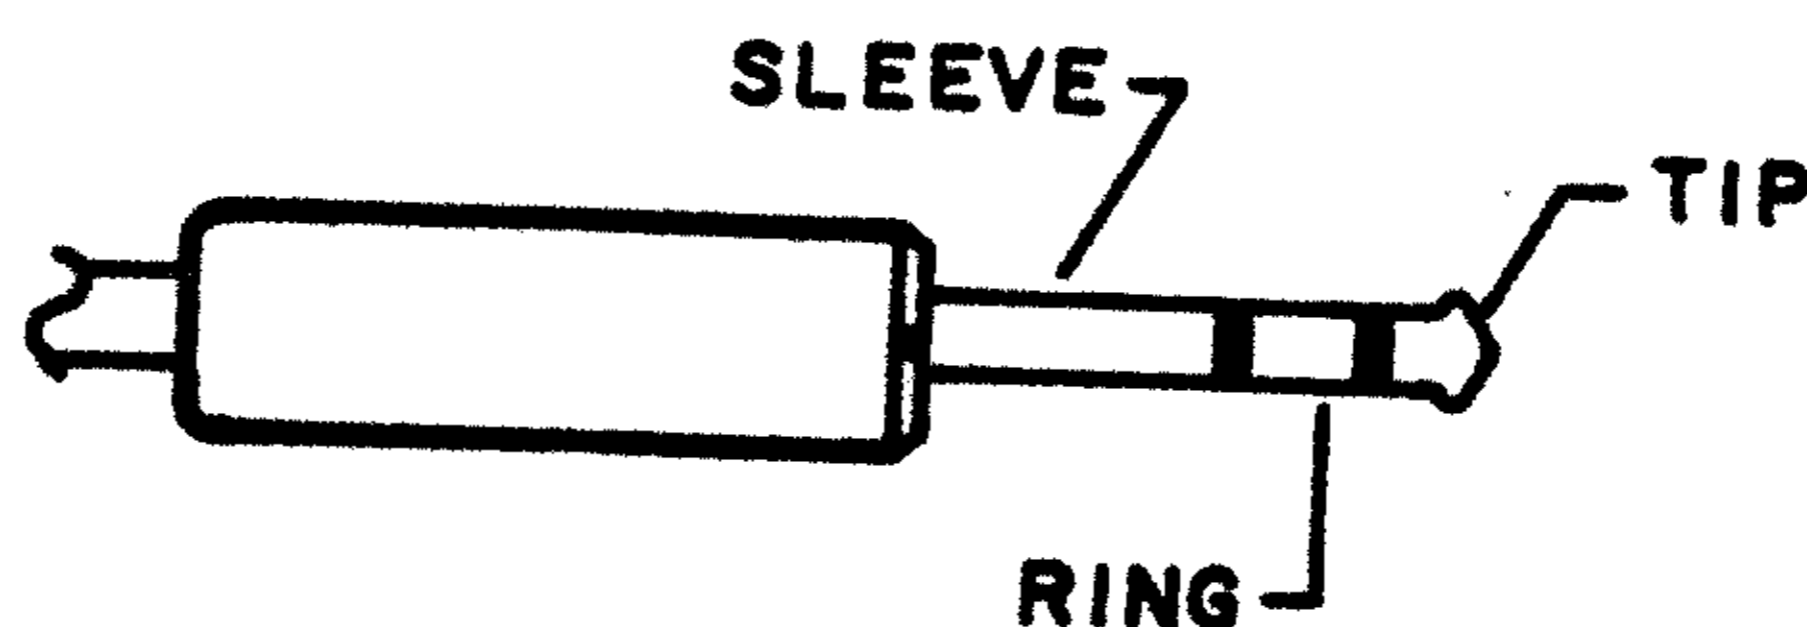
Tip-Ring-Sleeve Plug Outline Drawing.
